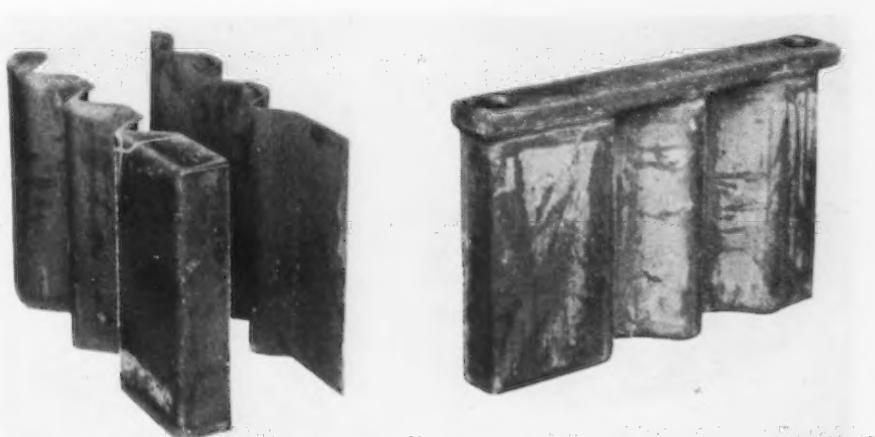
The steel generators, one size for all models, are made up of a front and a back stamping (at left) welded to a sheet steel manifold as shown at right.
